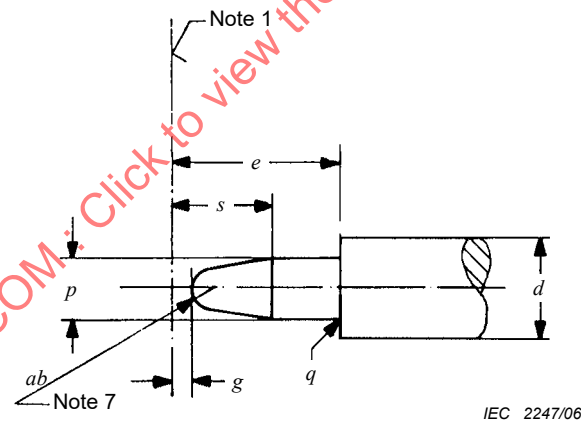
Details of pin centre contact (for notes and dimensions, see Table 1)
